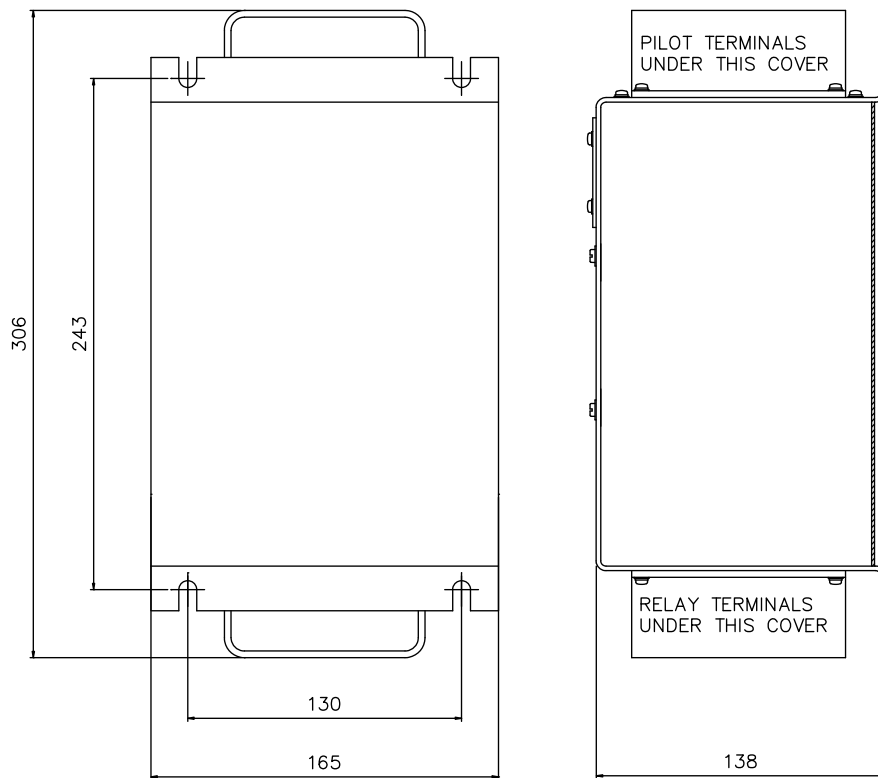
Intertripping Inverter Outline and Mounting Arrangement
